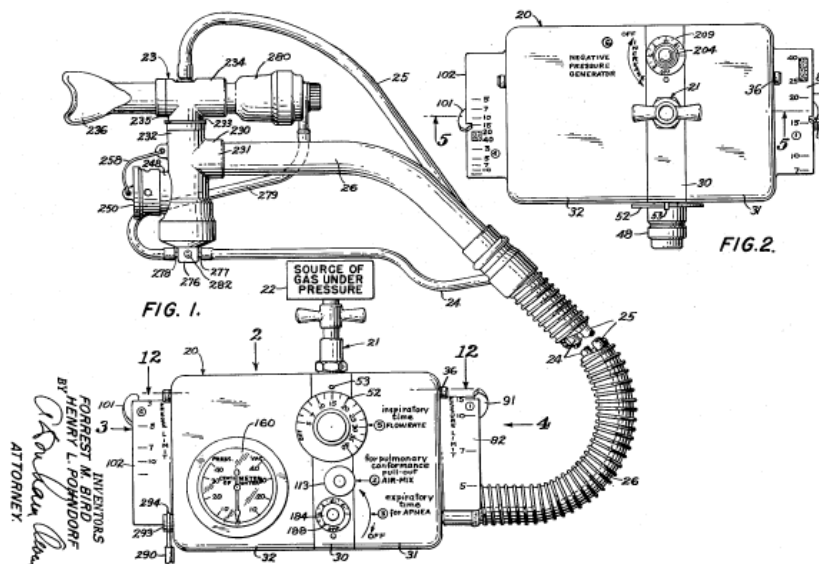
View in elevation of a respirator embodying the principles of the Bird Mark 7 invention with a control assembly shown in front elevation, connected to a breathing head assembly, shown in a side elevation (Fig. 1), and top plan view of the control assembly (Fig. 2) [15].
